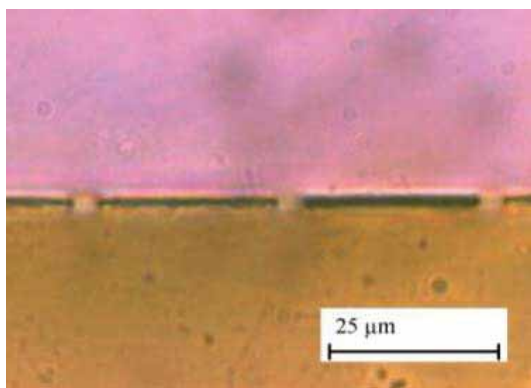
Laser welded sample in cross section (48W, 100mm/min). The tops of the 5 μ m wide tracks have been welded to the top sheet of PMMA. Gaps with a height of a few hundred nanometres have been left on either side of the welded tracks.
